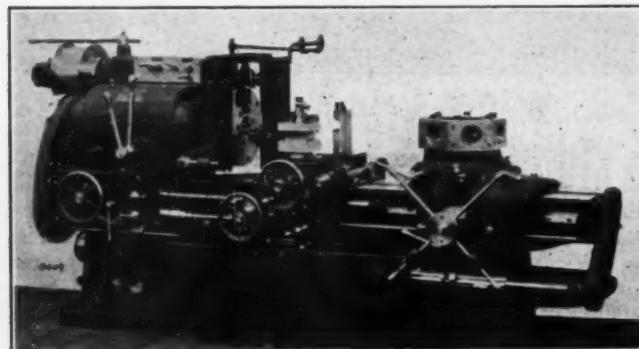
A COMBINATION TURRET LATHE SWINGING 20 IN. OVER THE SADDLE
